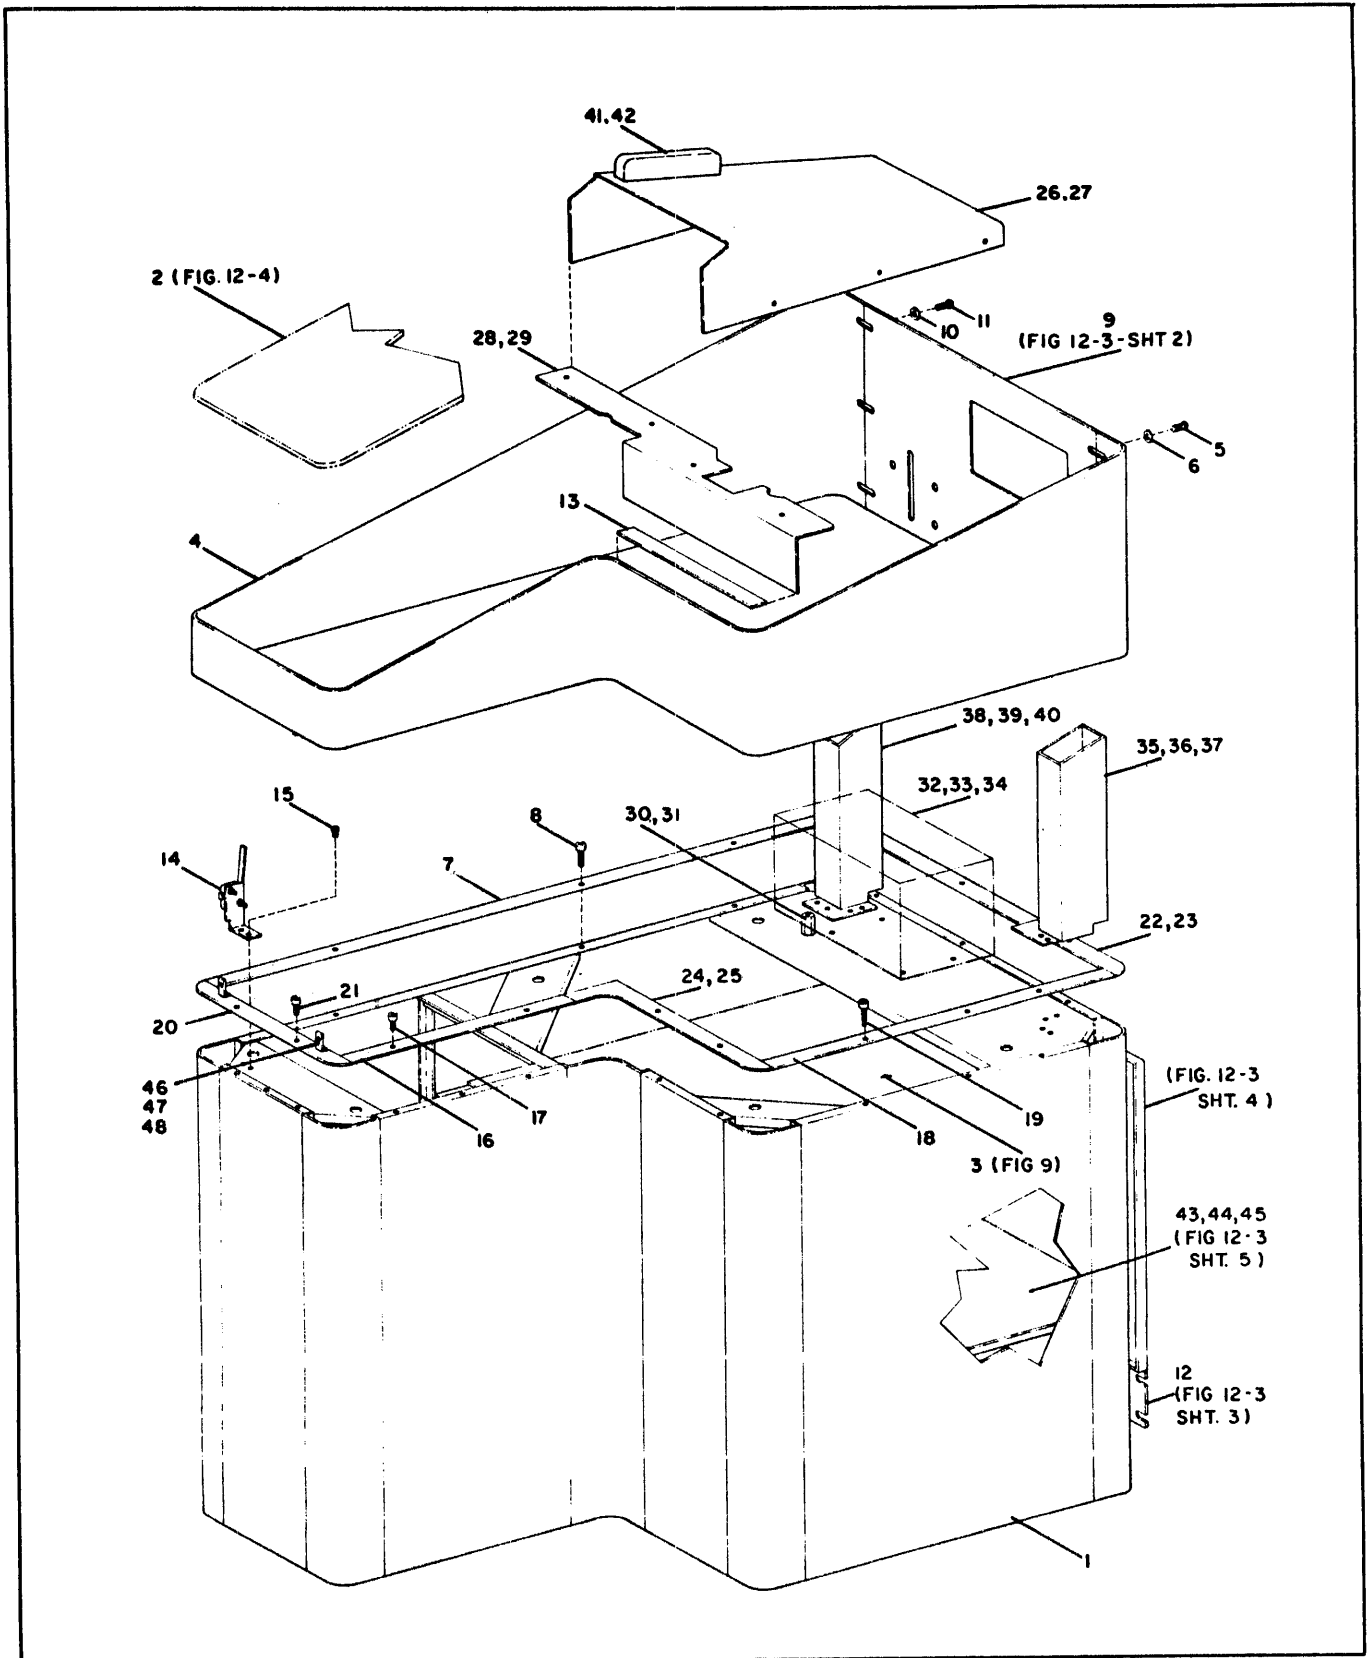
TRIM GROUP ASSEMBLY (sheet 1 of 6)
